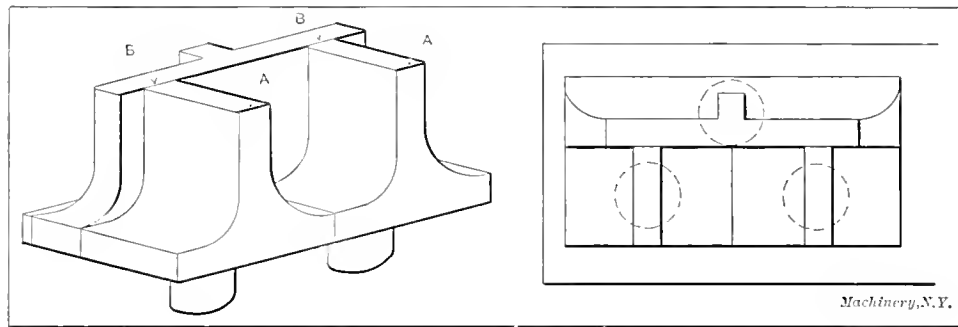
Sectional Punch for Producing the Blank shown in Fig. 2
